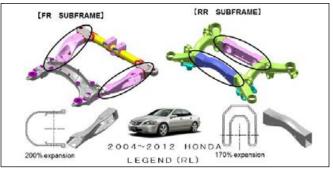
Hot bulge formed sections of aluminum extrusions welded into subframes for the 2004-2012 Honda Legend (RL) produced by F.tech.
